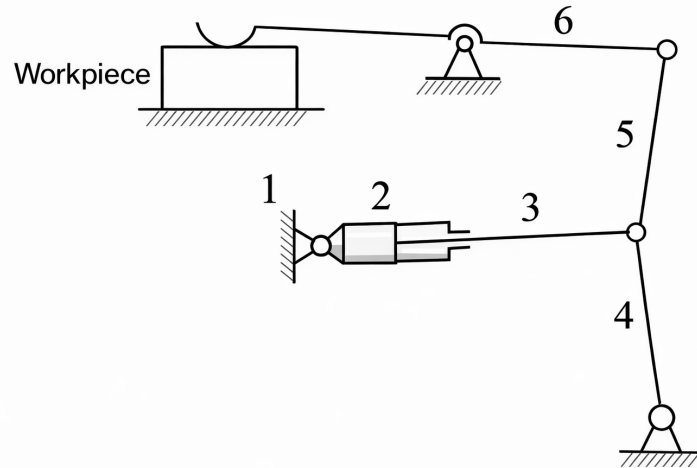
Schematic diagram of the mechanism movement of the automatic workpiece clamping device
